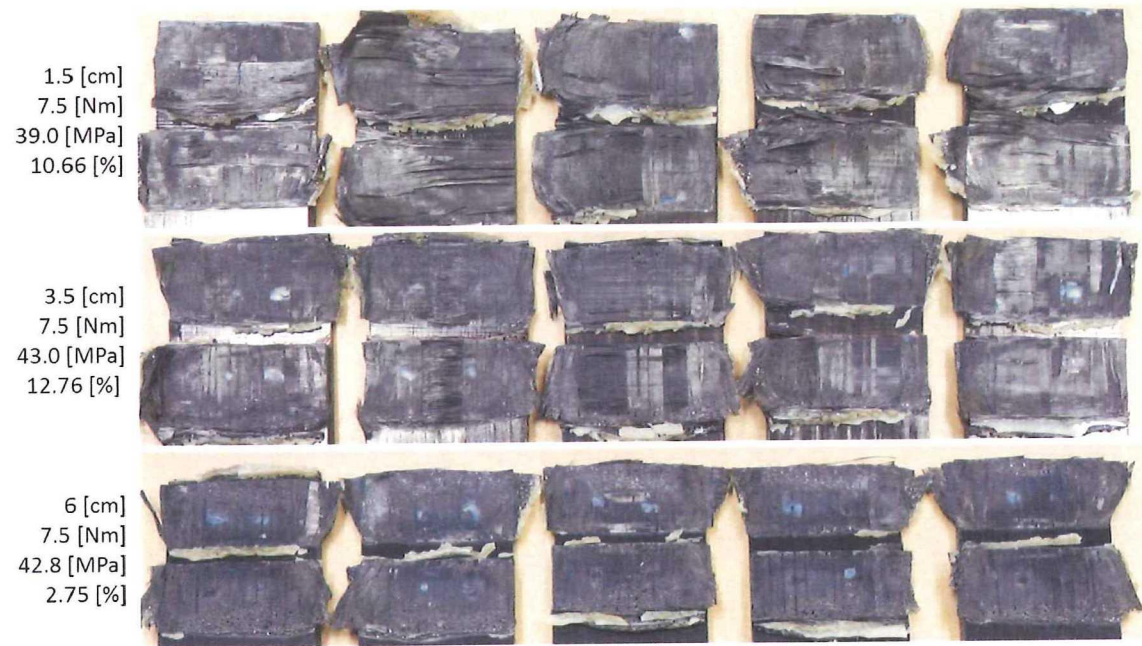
Fracture surfaces of single-side clamped ASTM D1002 samples clamped with rubber pads at the distances: 1.5 [cm], 3.5 [cm], and 6 [cm]. The bolts of the clamp are tightened with 7.5 [Nm]. Welding settings: 70.4 [μ m]; 500 [N]; 0.11 [mm]. The third value given is the LSS and the fourth is the CoV of the LSS.
